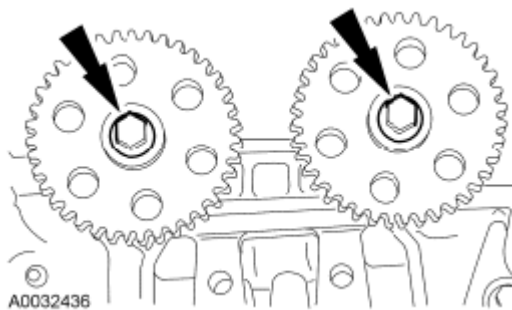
Locating Camshaft Drive Sprockets Bolts
